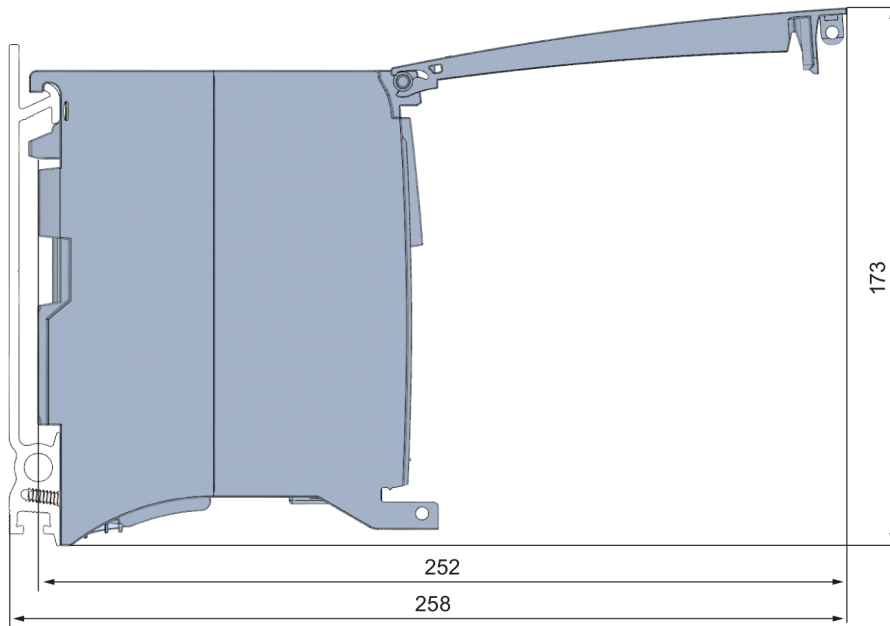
Dimensional drawing of the IM 155-5 DP ST interface module, side view with open front cover
